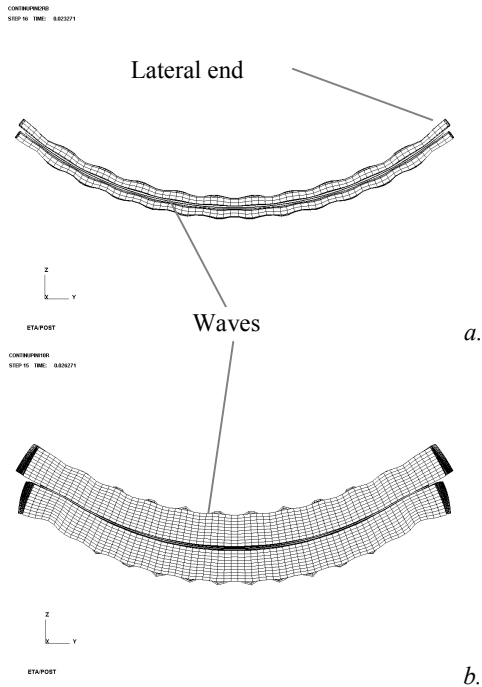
Front view of the rubber interpolators and blank assembly after deformation: a. 2 mm thickness; b. 10 mm thickness
